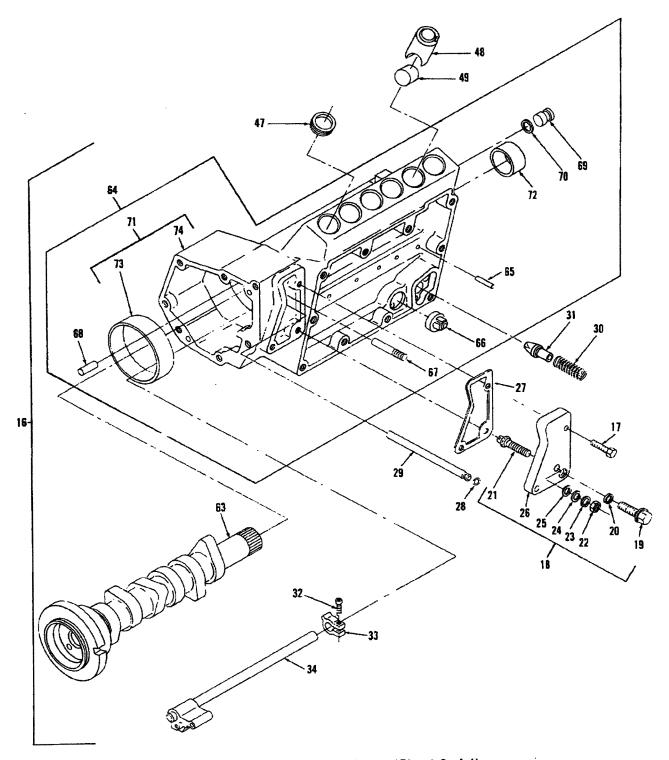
Fuel Injection Pump (Sheet 3 of 4)
